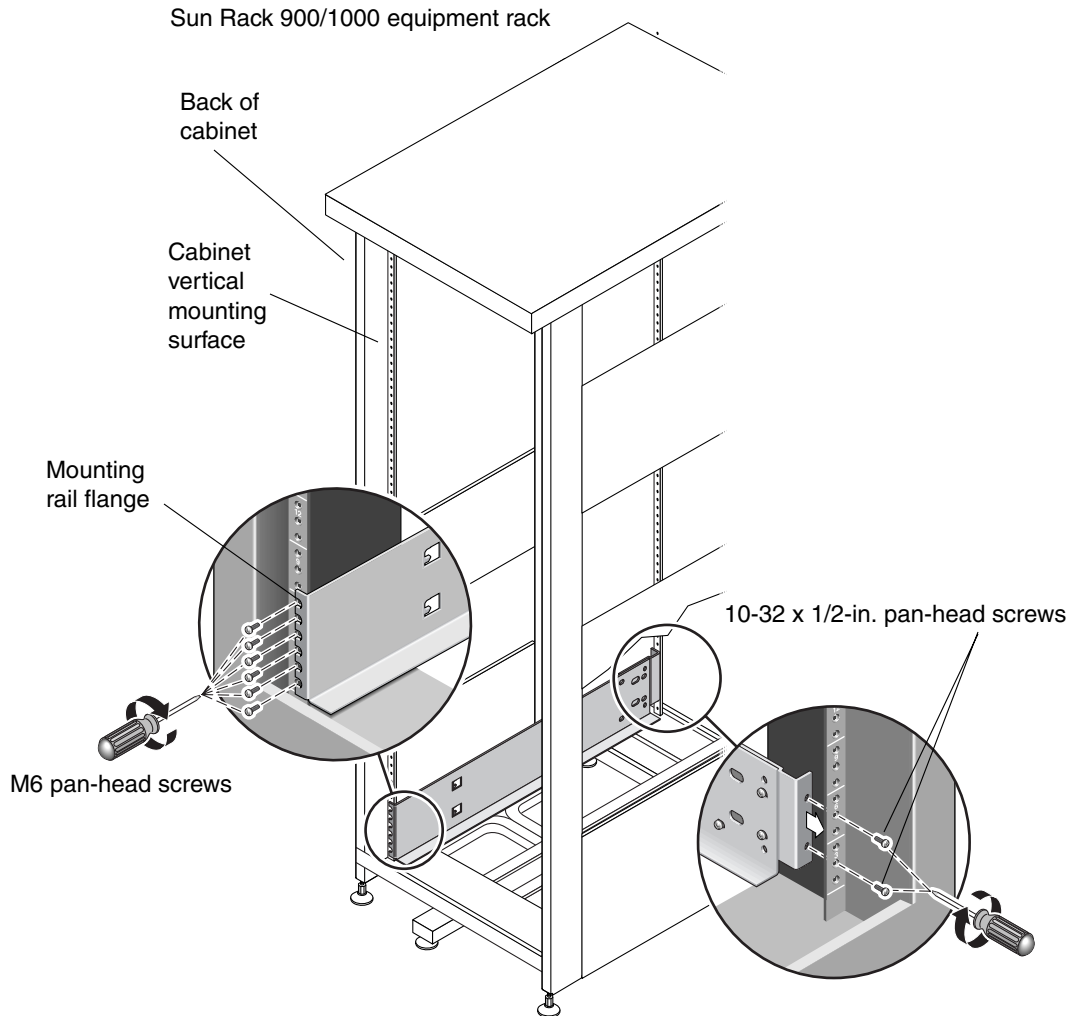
Mounting Rail Assembly (One of Two) for the Cabinets
